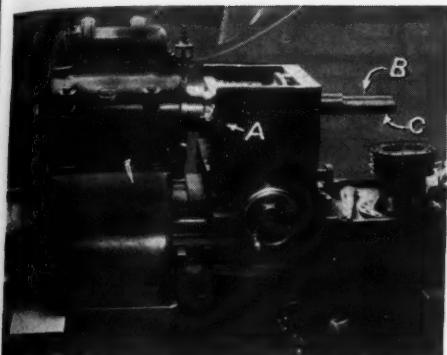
The small cylinders are diamond-bored in this Ex-Cell-O diamond boring machine.
